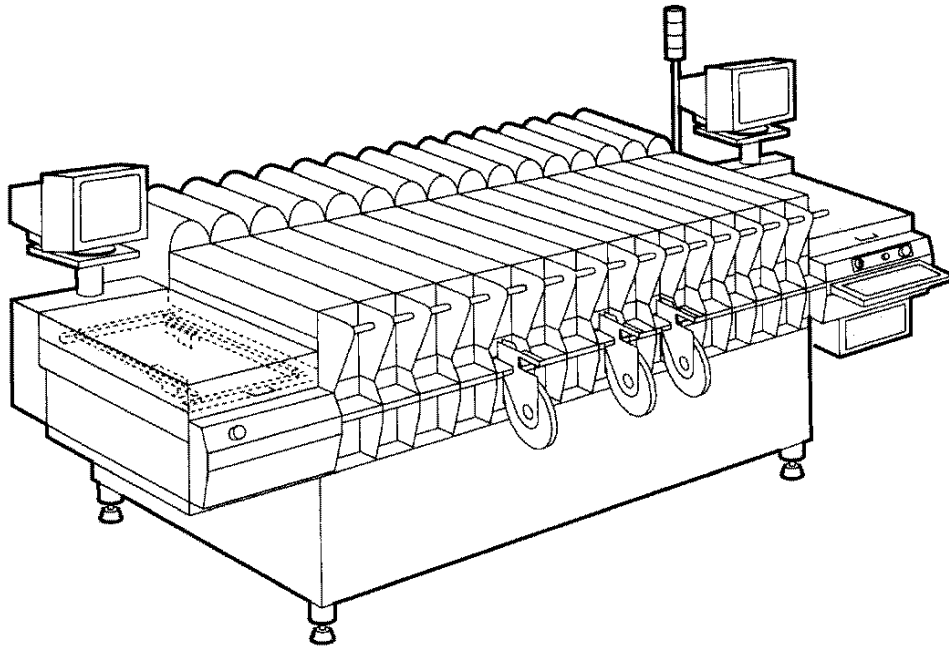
A sketch of the FCM SMD assembly machine.
